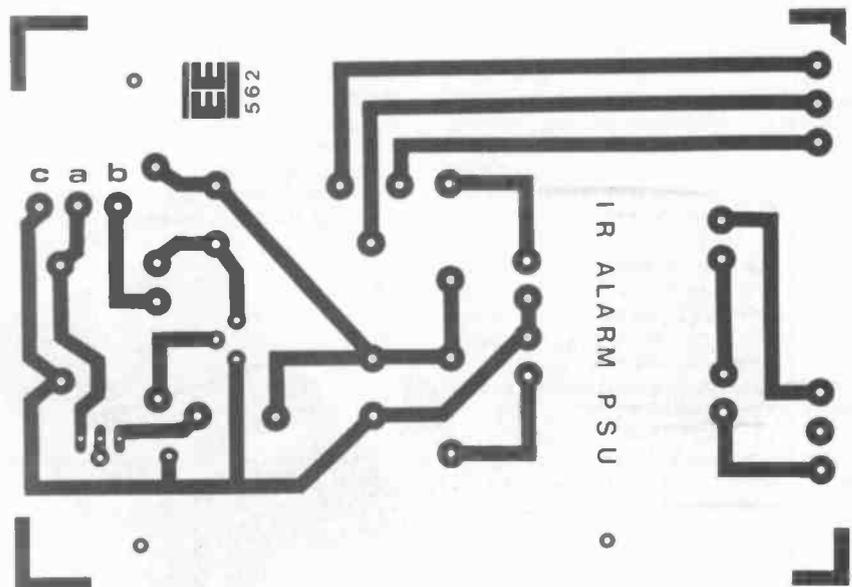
Full size printed circuit master pattern for the Infra Red Alarm—Power Supply/Relay Drives.
